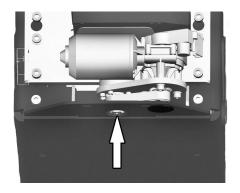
Remove the protective rubber cover underneath the chassis to get access to the seat elevator
